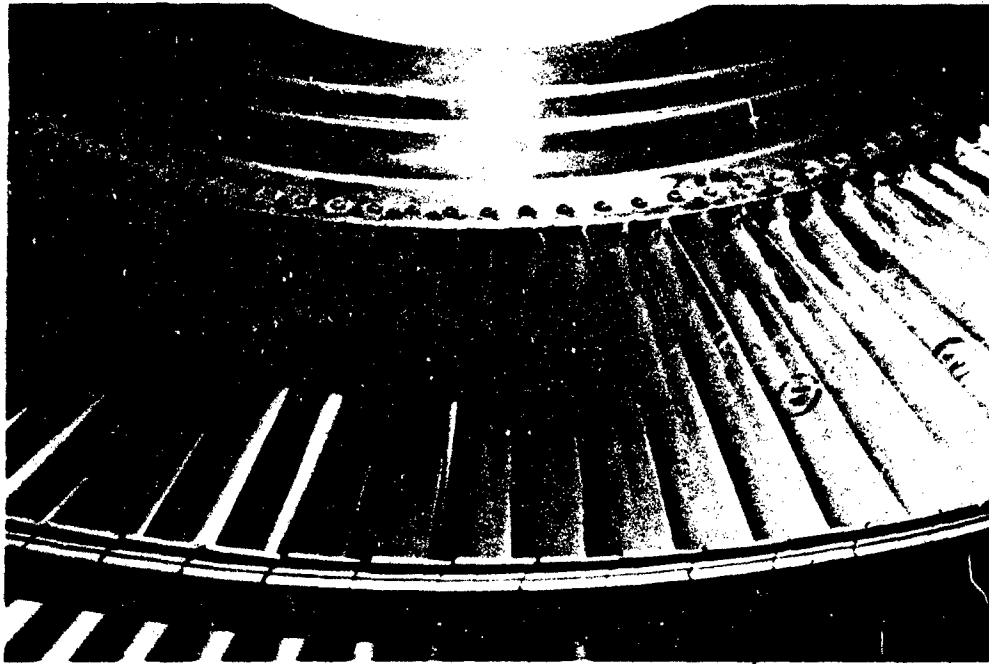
Build IV, Section Rotor, Leading Edge Showing Cut-Back Inside Diameter Platforms and Tripwires (XPN-23416)
